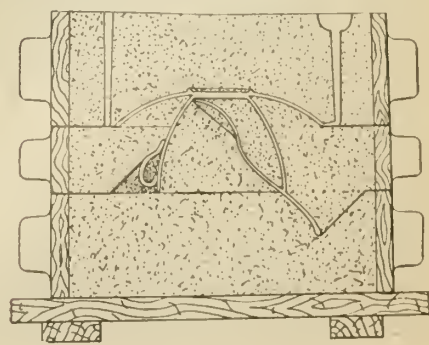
CROSS-SECTION OF MOLD WHEN COMPLETED.
